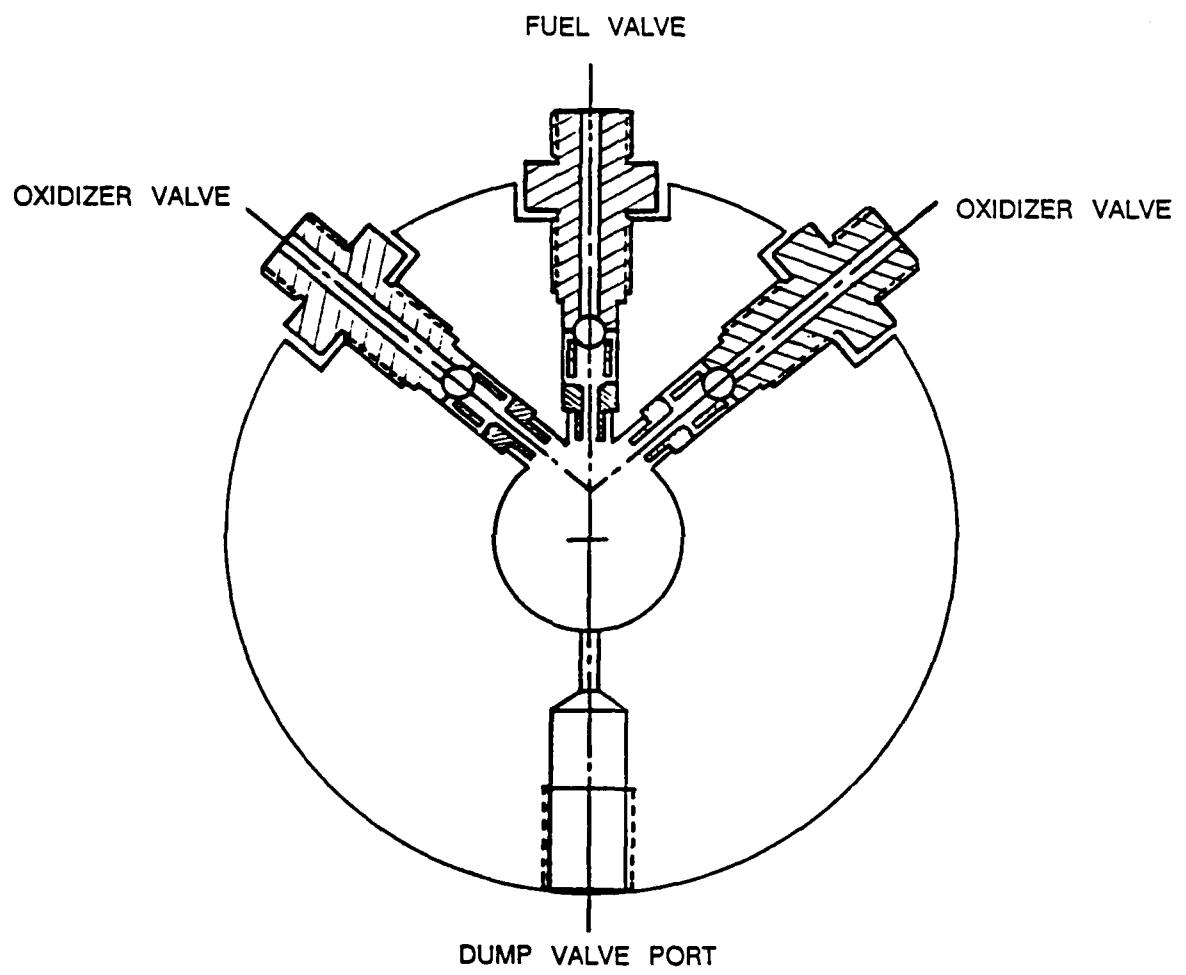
Cross Section of Ignition Fixture at Injection Valves
